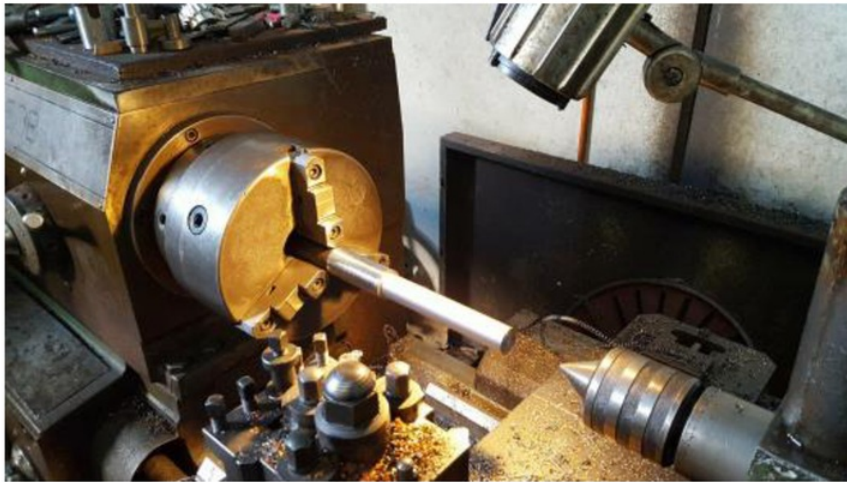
Cutting the rod to 27.5mm diameter by turning machine with a three jaw chock.
